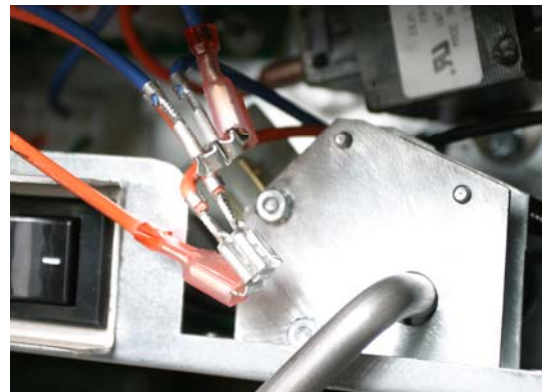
The brace for the U-bolt, which supports the rear discharge plumbing should align with these holes in this vertical brace.
